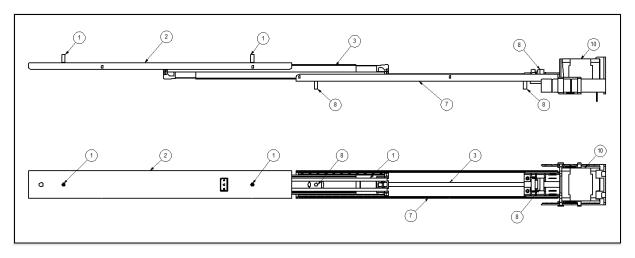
Side and overhead view of the FULLELECTRIC® Slide
